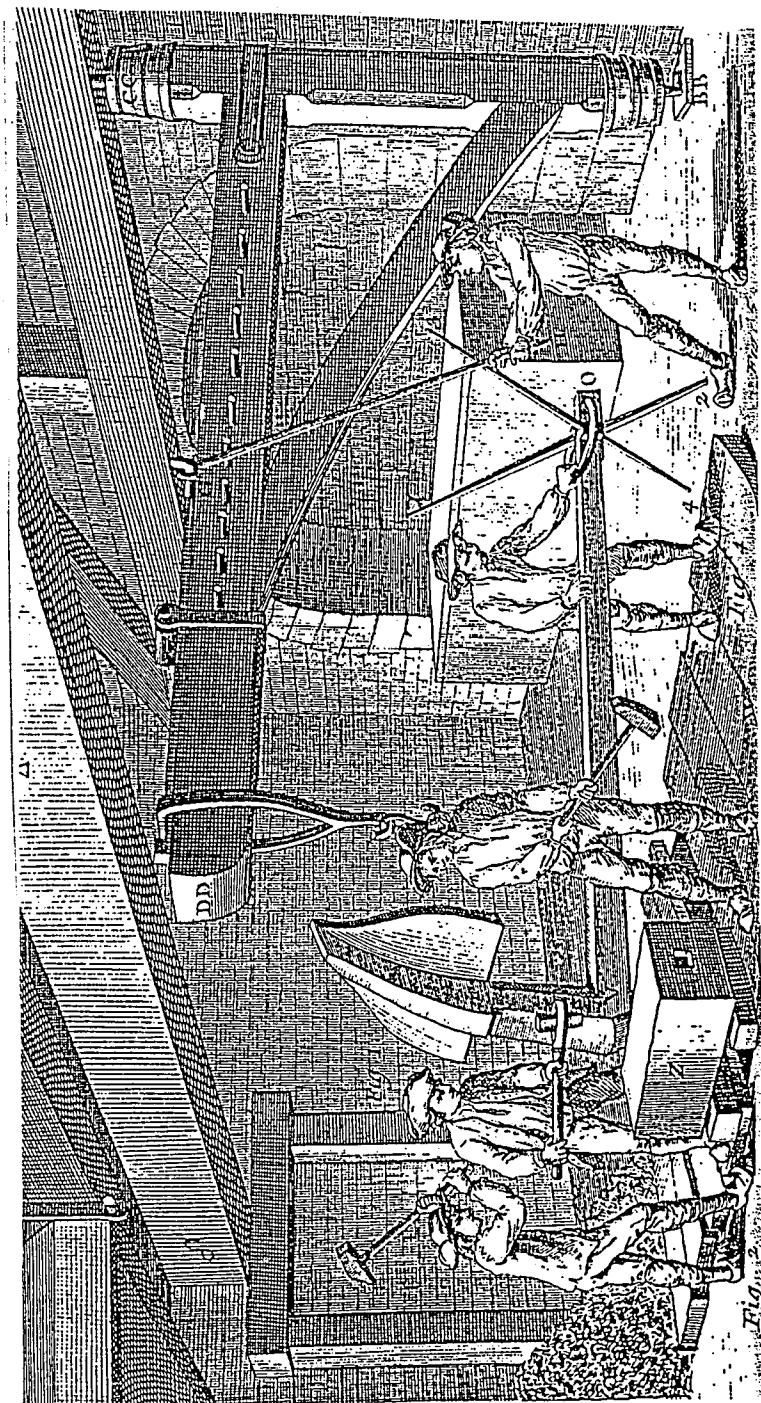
A view from anchor house. From Betty Nelson Currier's *Anchors*, p. 72.
